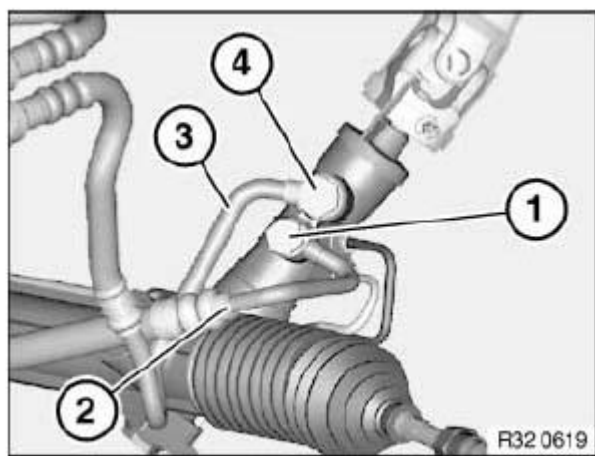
Identifying Banjo Bolts, Pressure Line And Return Line
